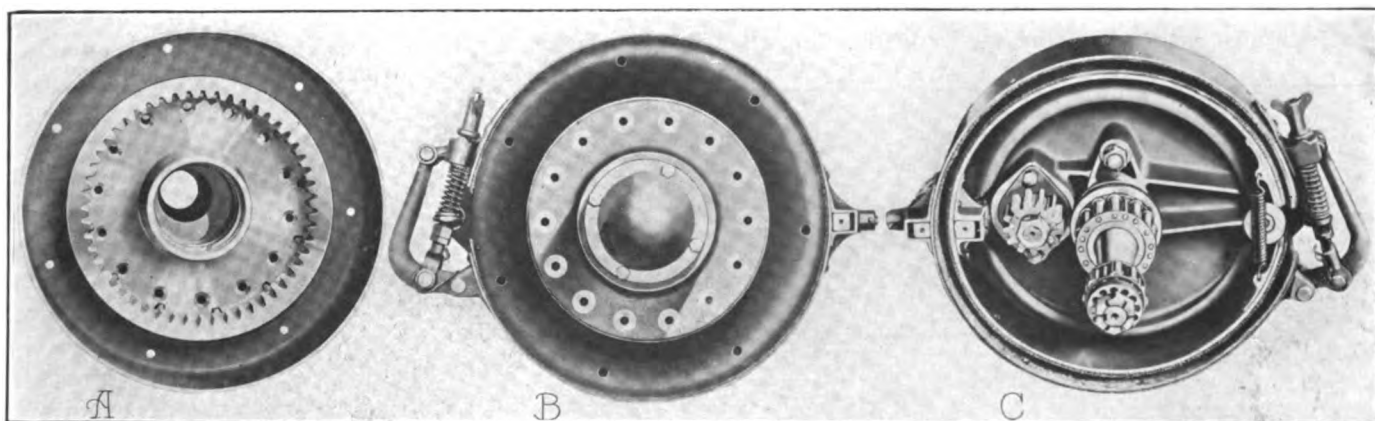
A, Wheel Hub, Brake Drum and Internal Gear of the Torbensen Rear Axle; B, the Brake Drum and Service Brake Assembled; C, End View of Axle with the Driving Pinion in Place.
